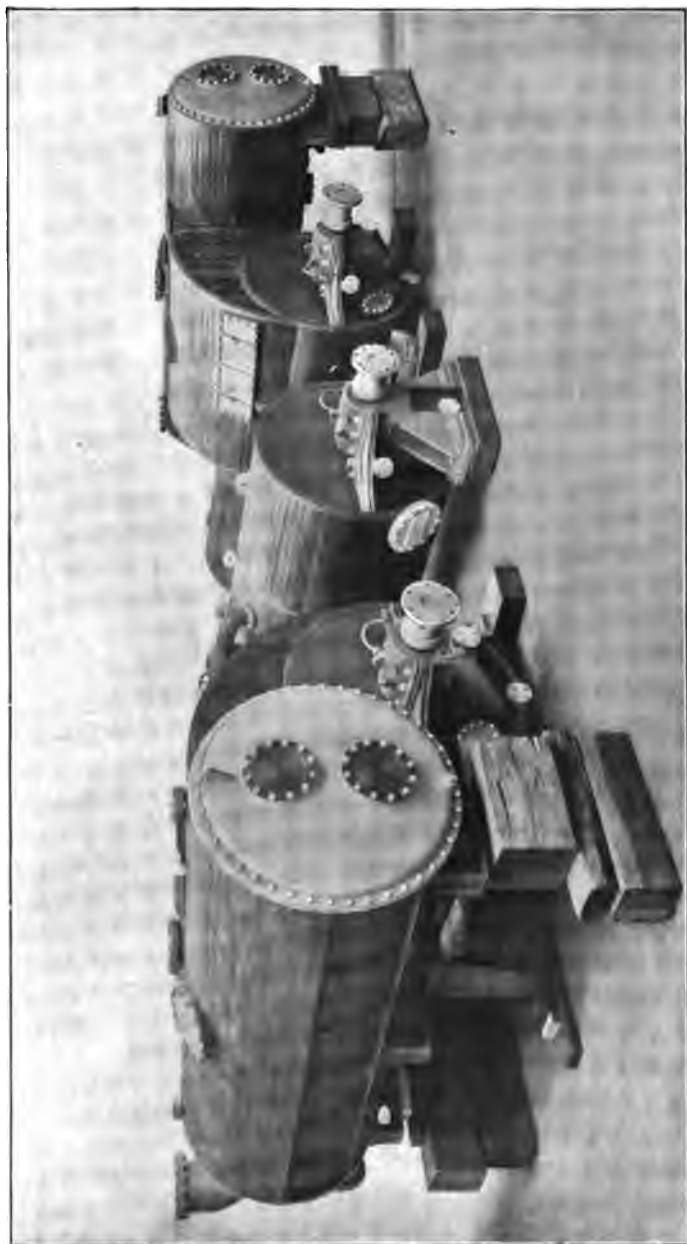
PLATE XLII.—THE PROPELLING ENGINES OF THE STEAM YACHT "EMERALD."
